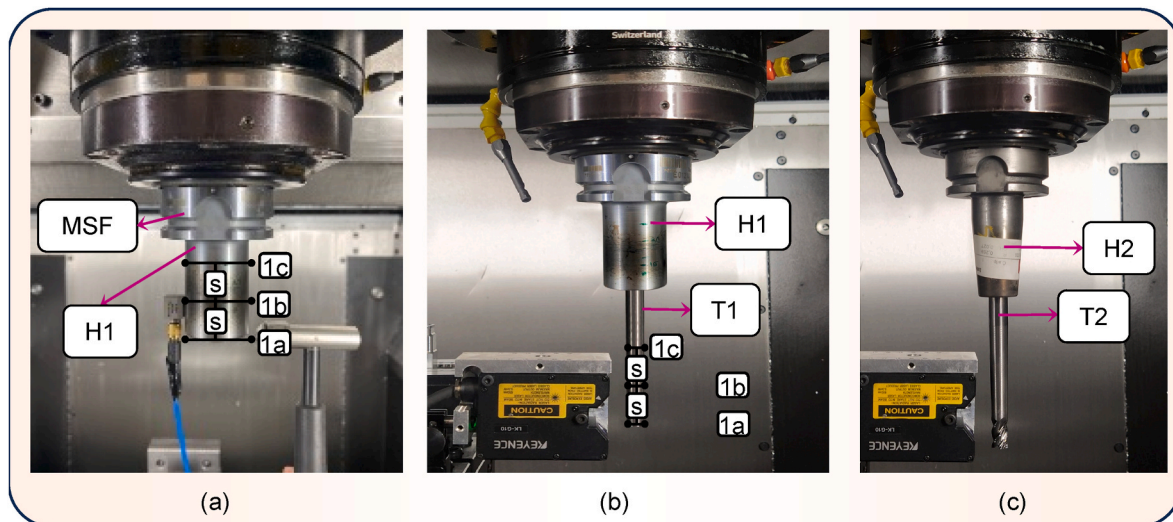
Experimental setups used to compare the proposed and existing methodologies. (a) Machine-spindle-flange and Holder 1 (H1) setup for characterising the machine-holder interface, (b) Holder 1 (H1) and Tool 1 (T1) setup for measuring contact stiffness at the holder-tool interface, (c) Holder 2 (H2) and Tool 2 (T2) setup used for validating the prediction.
